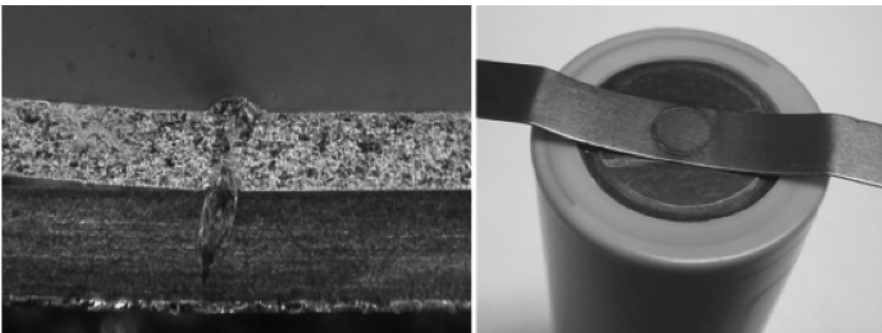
Laser welding of busbars to cylindrical battery cans. (Reproduced with permission from Amada Miyachi.)
